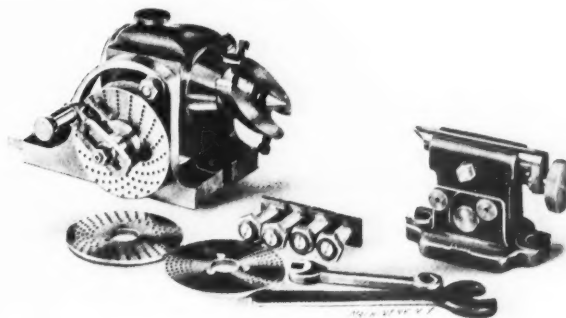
Universal Dividing Head, and Tail-stock for Fox Miller.
